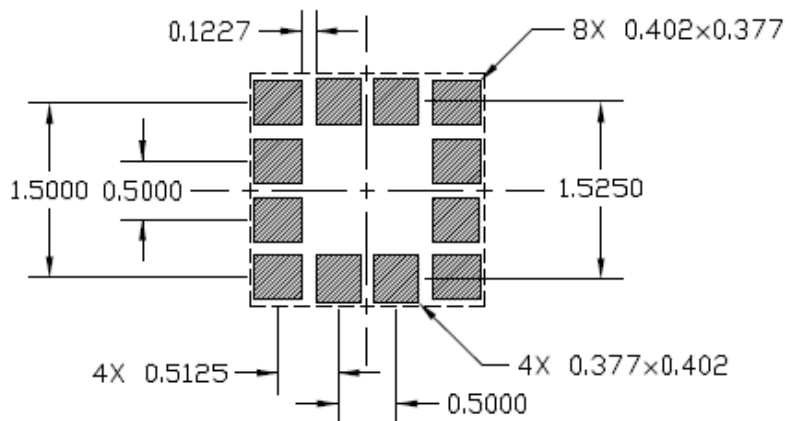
Example of solder mask for the 2 x 2 mm LGA package (Top view)
